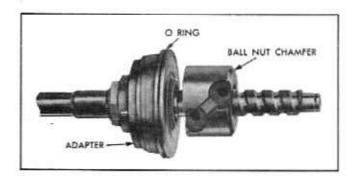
Shaft, Ball Nut and Adapter Assembly
